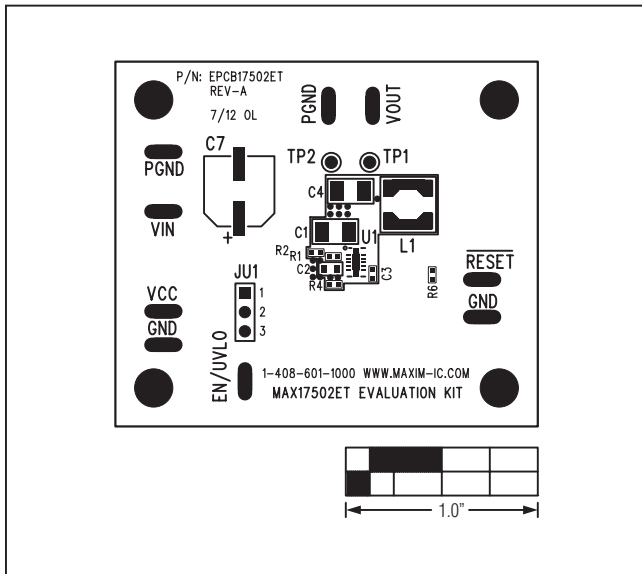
MAX17502E EV Kit Component Placement Guide—Component Side
